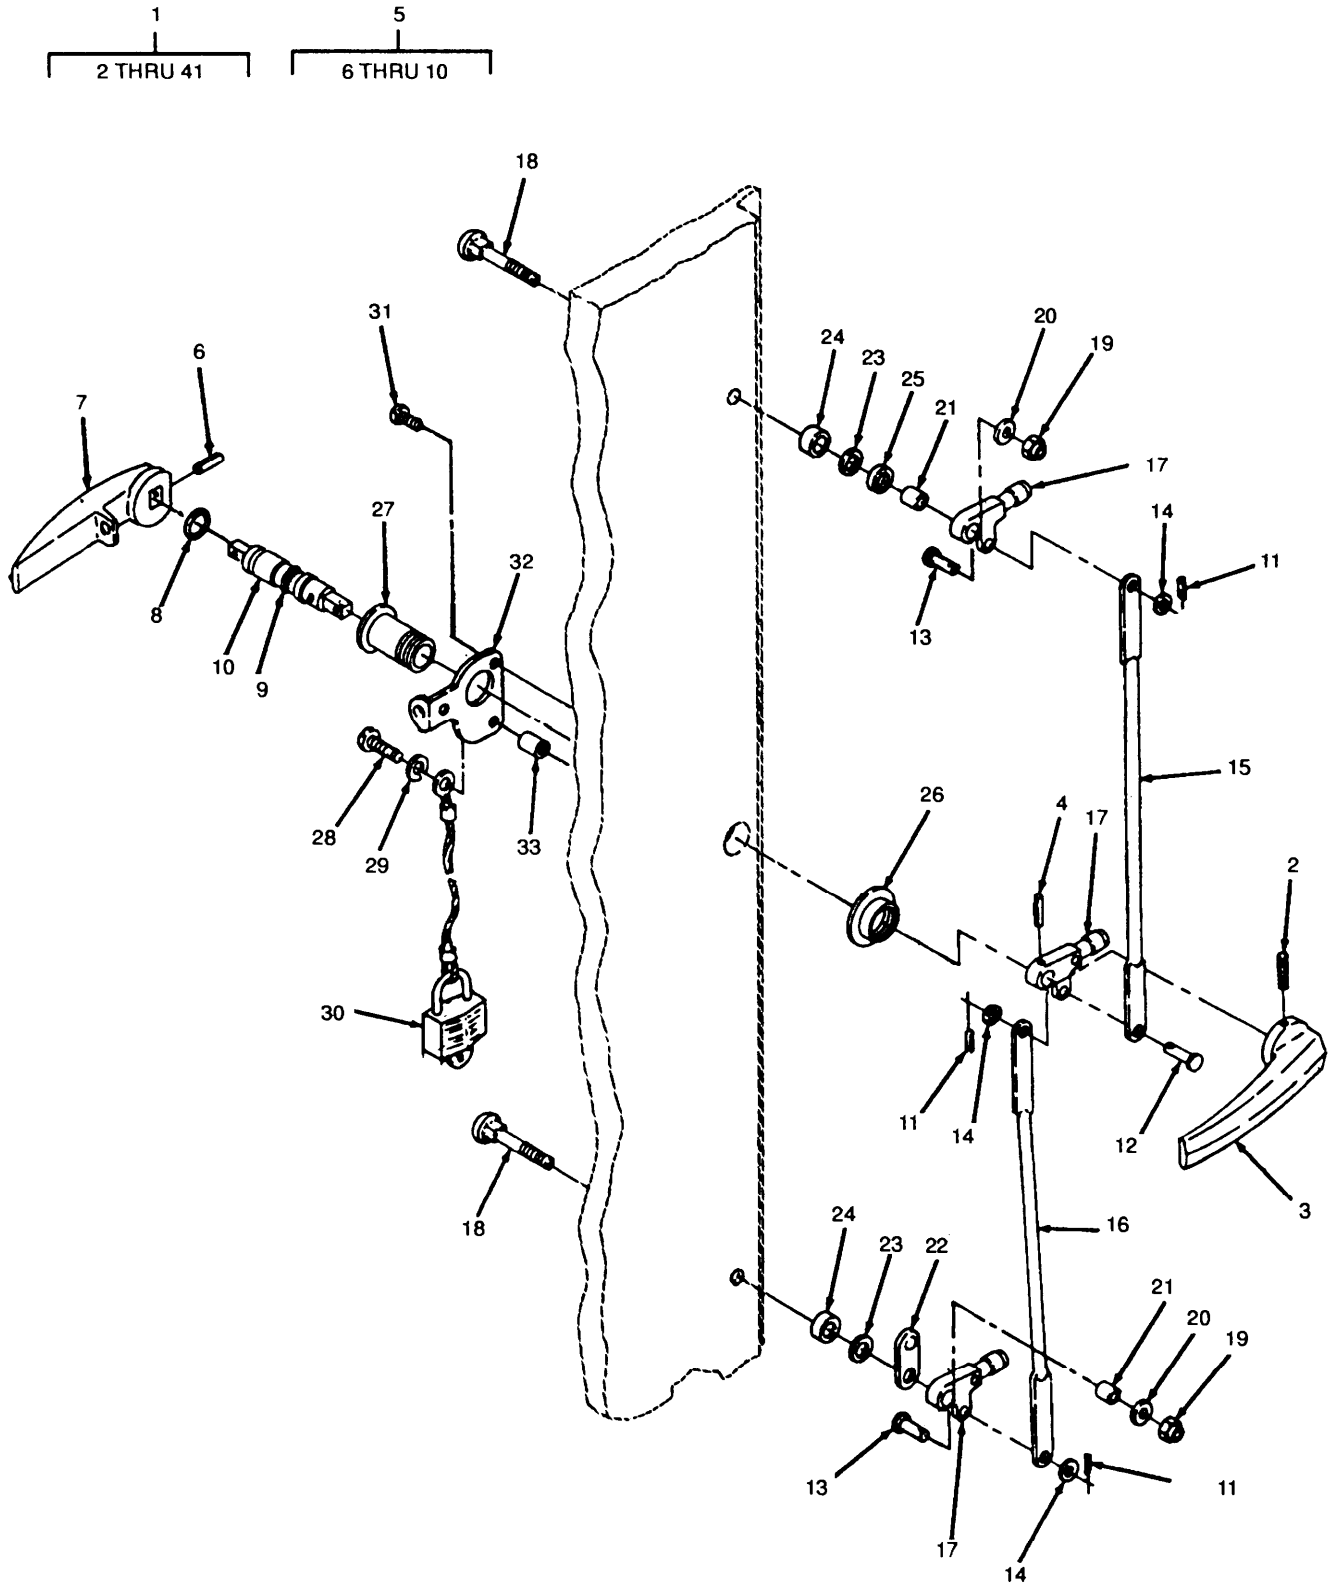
Door Handles, Locks and Latches (Sheet 1 of 3).
